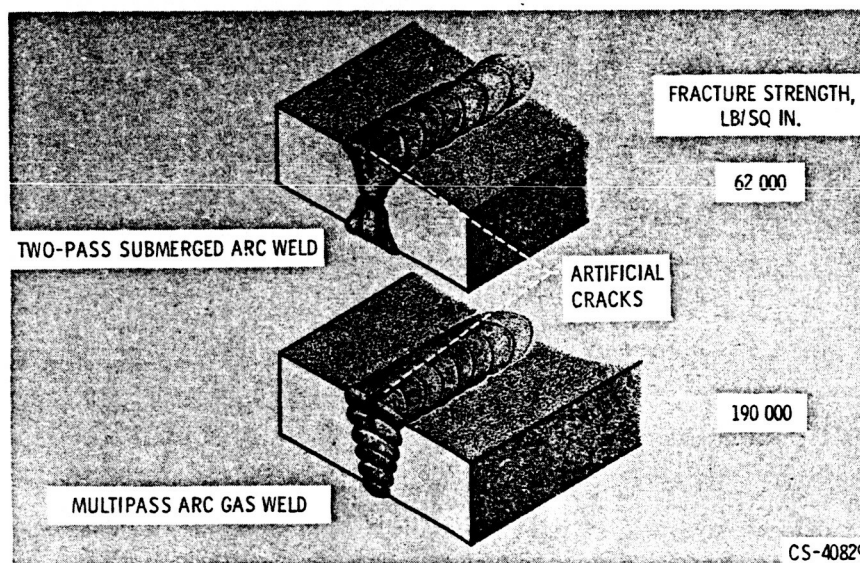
Types of weld used in manufacturing 260-inch-diameter solid propellant rocket casings.
